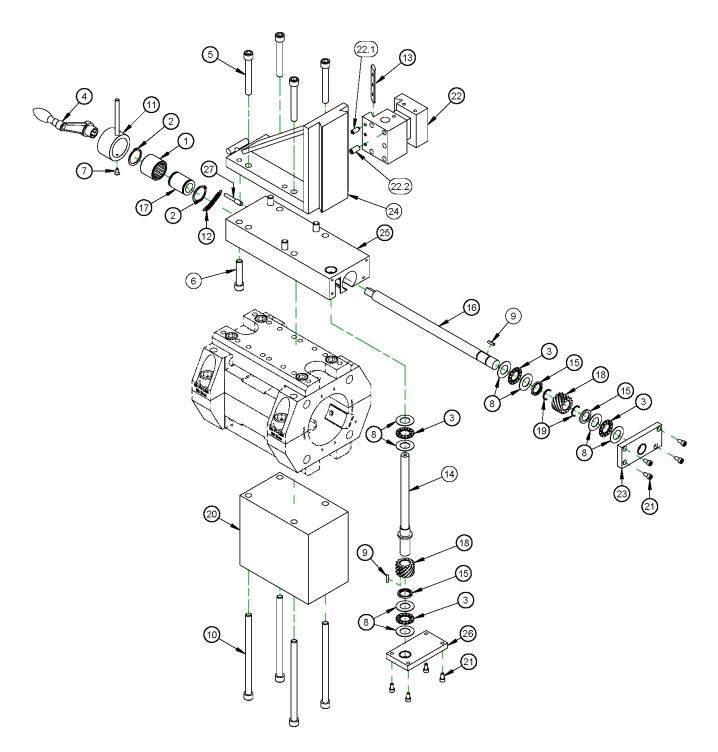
ROTATIONAL DRIVE ASSEMBLY (P/N 22221)
